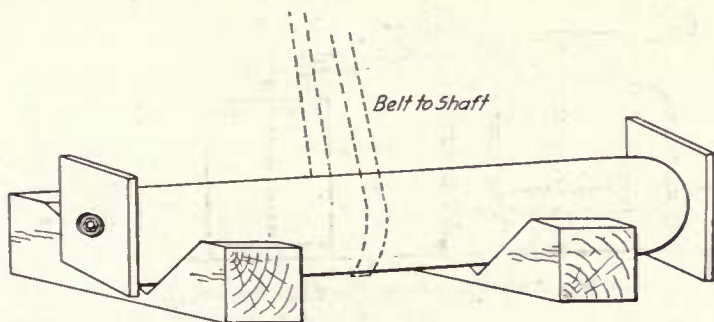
Device for Finishing the Inside of a Cylinder for an Air Hoist.
